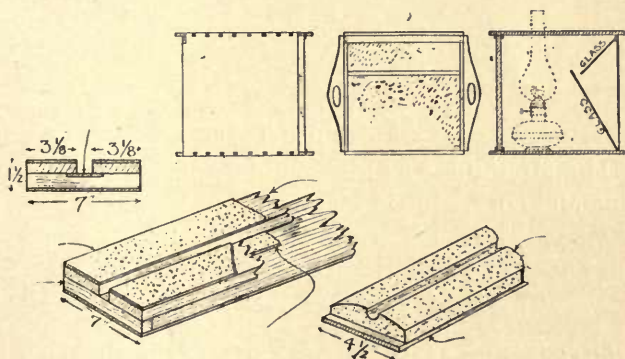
MOTH-TRAP AND MOUNTING-BOARDS.
